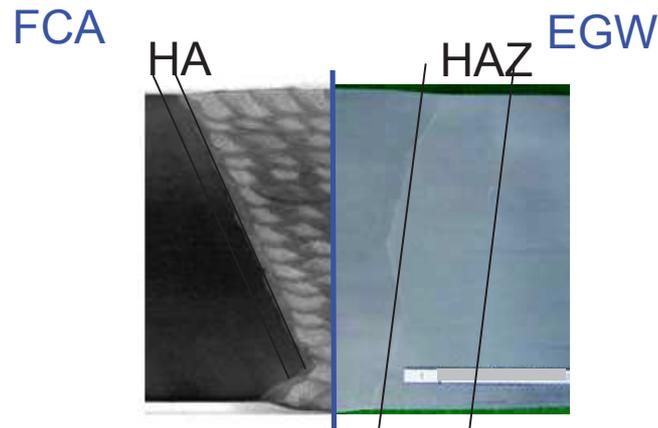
Weld Macros illustrating differing Heat Affected Zones for different welding processes.
